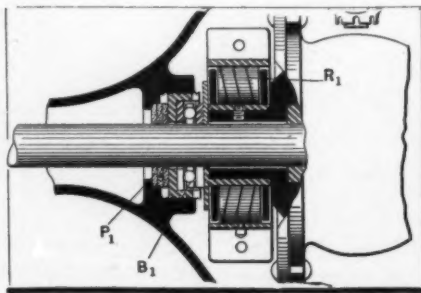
Section of propeller shaft, showing application of Hyatt roller bearings for radial loads, and ball thrust bearings for bevel thrust work
